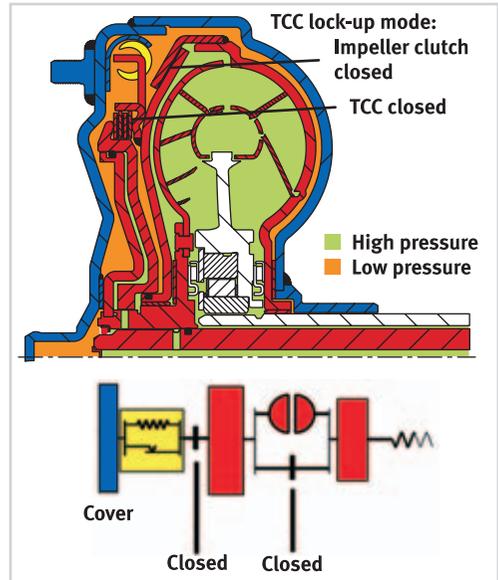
Pressurizing the closed piston engages the torque converter clutch
